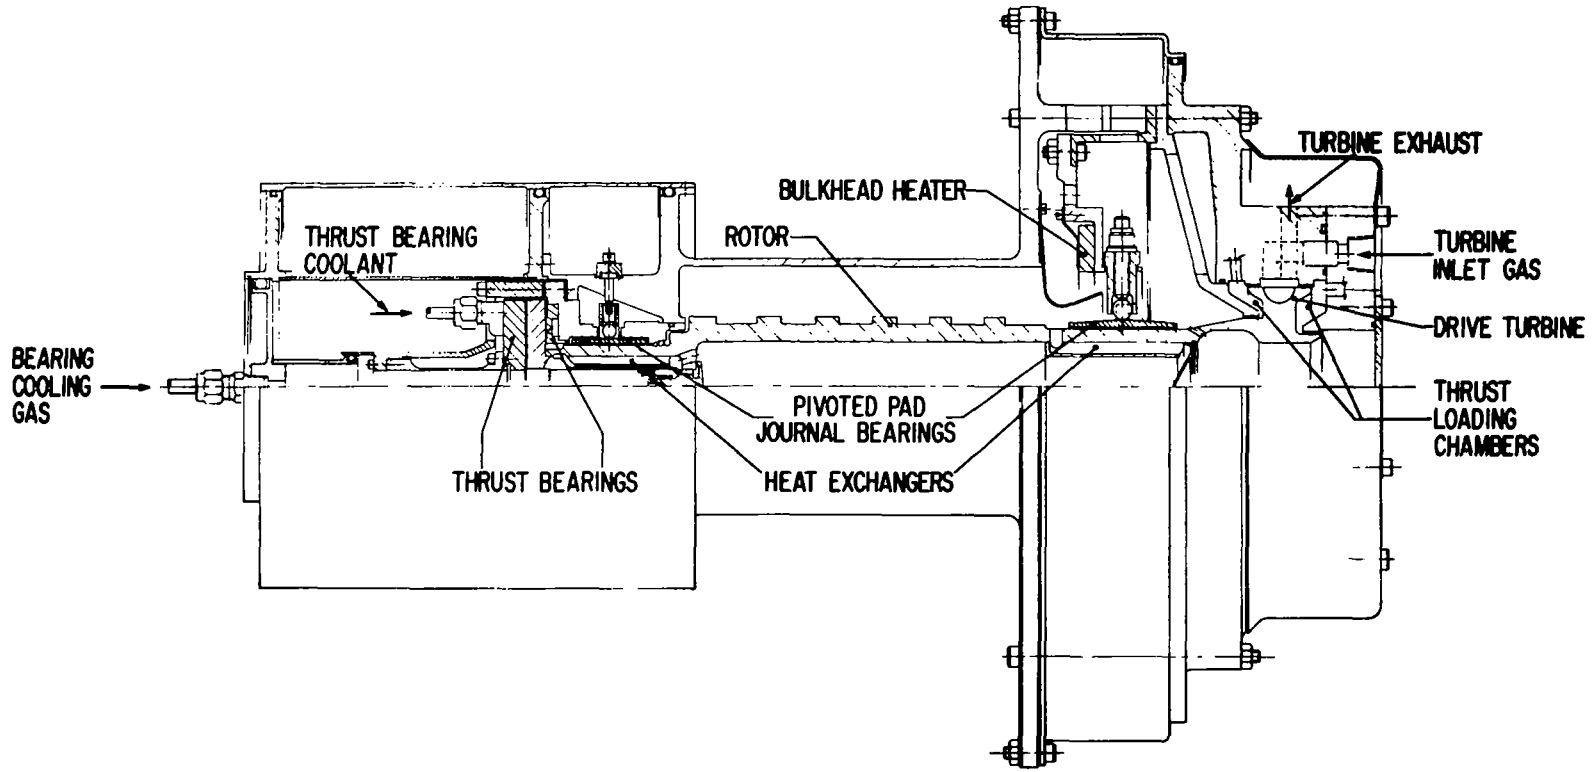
Cross-Sectional View of Rotor-Bearing System Simulator
